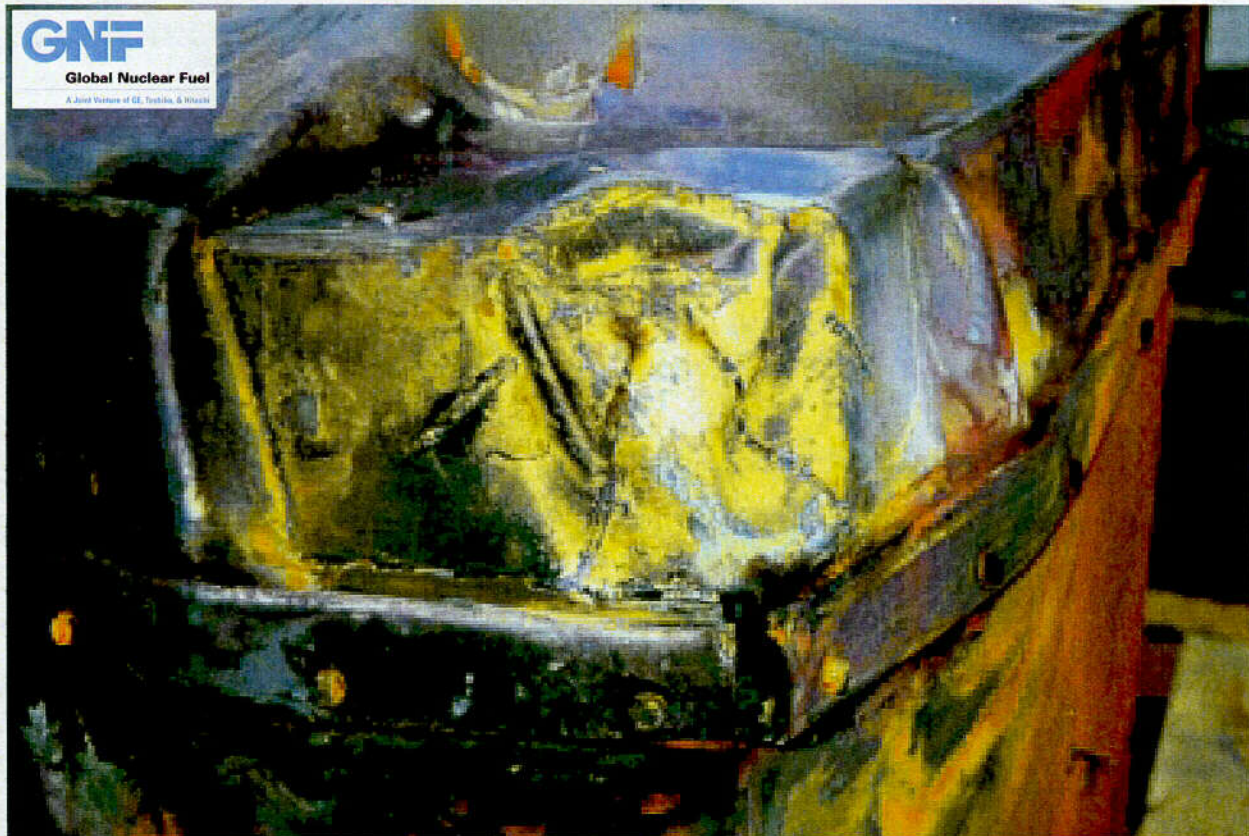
CTU-1 Post-Test Disassembly; Close-up View of Damage
